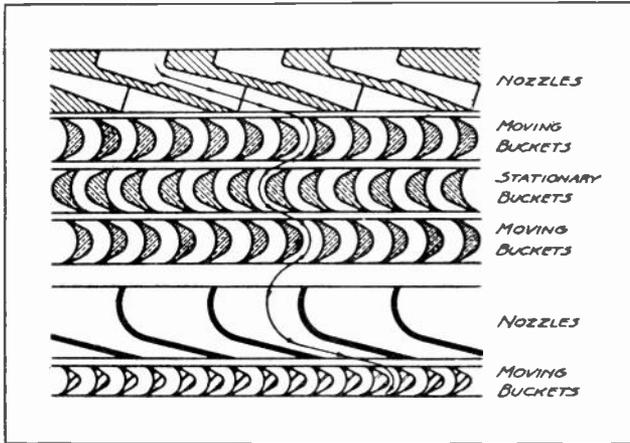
This sketch illustrates the operating principles of a steam turbine. Note the nozzles and stationary and moving blades or buckets. Courtesy of Elliott Company.
